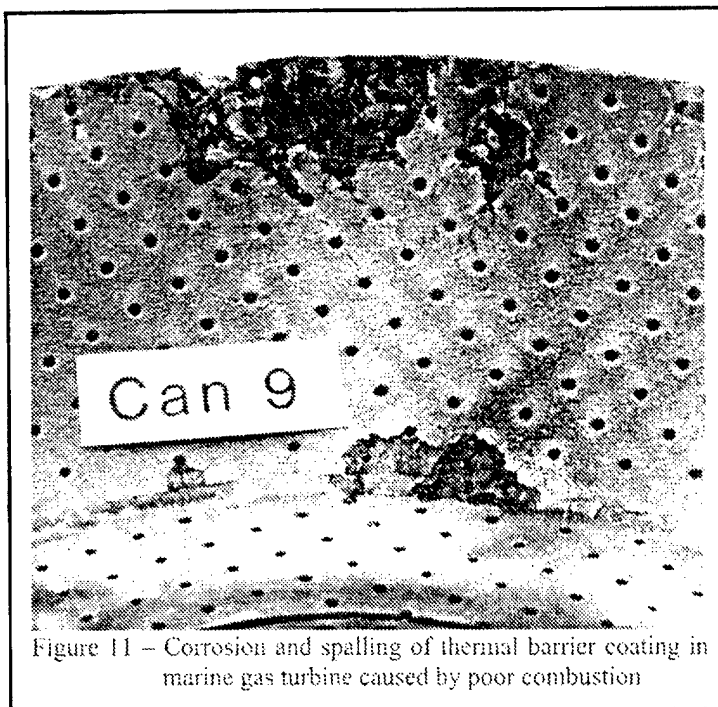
Corrosion and spalling of thermal barrier coating in marine gas turbine caused by poor combustion
